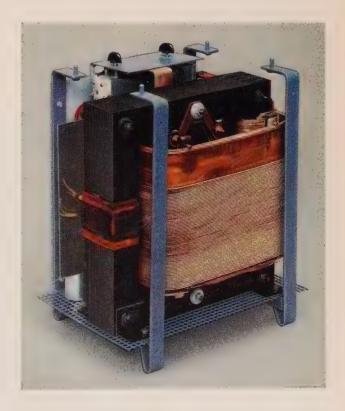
Arc welding transformer LR 4v, cover removed
